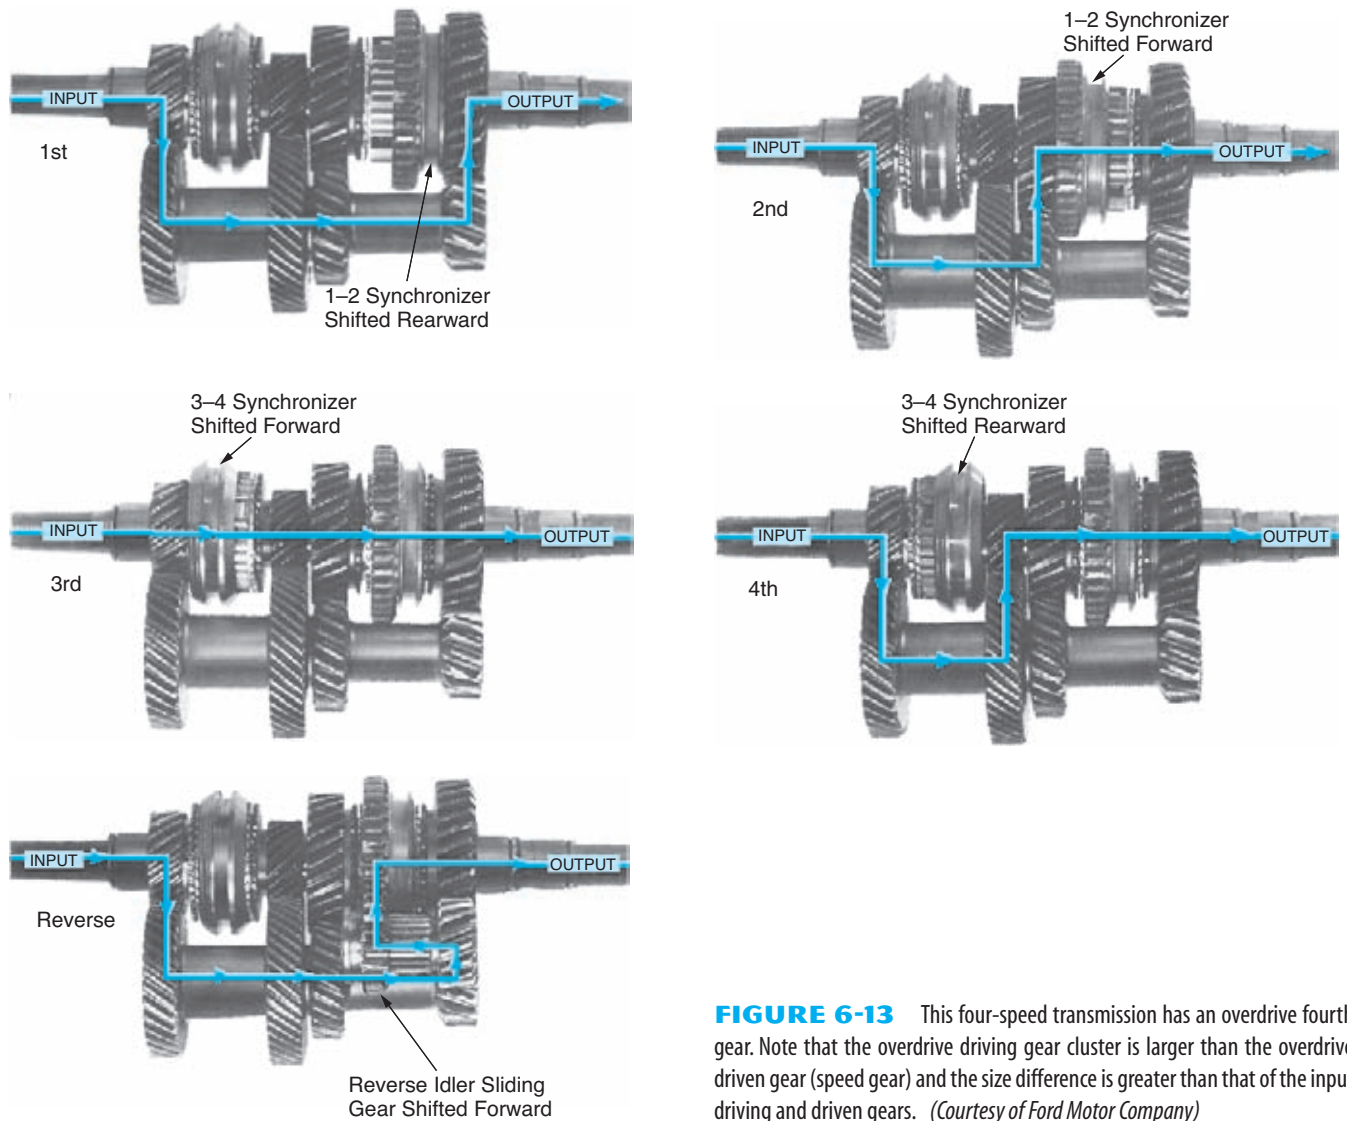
This four-speed transmission has an overdrive fourth gear. Note that the overdrive driving gear cluster is larger than the overdrive driven gear (speed gear) and the size difference is greater than that of the input driving and driven gears. (Courtesy of Ford Motor Company)
